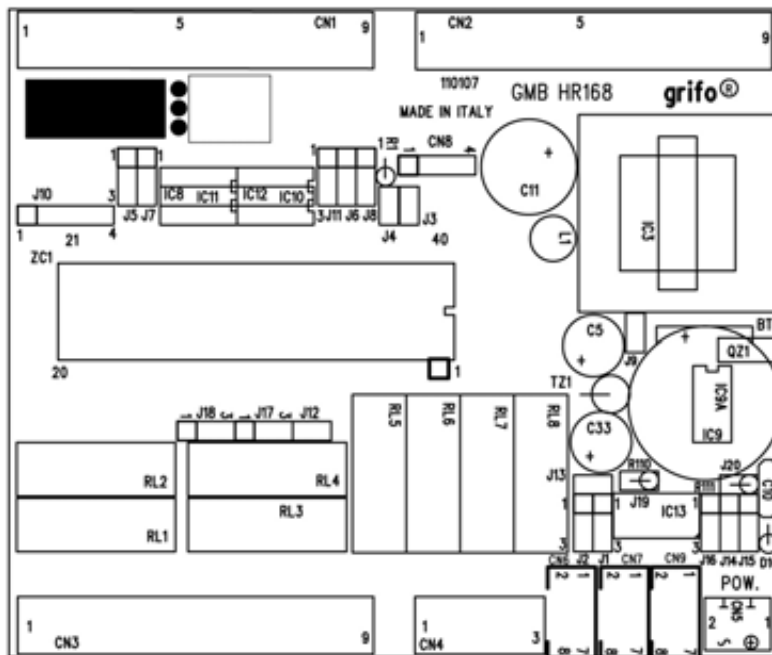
COMPONENTS MAP SOLDER SIDE
